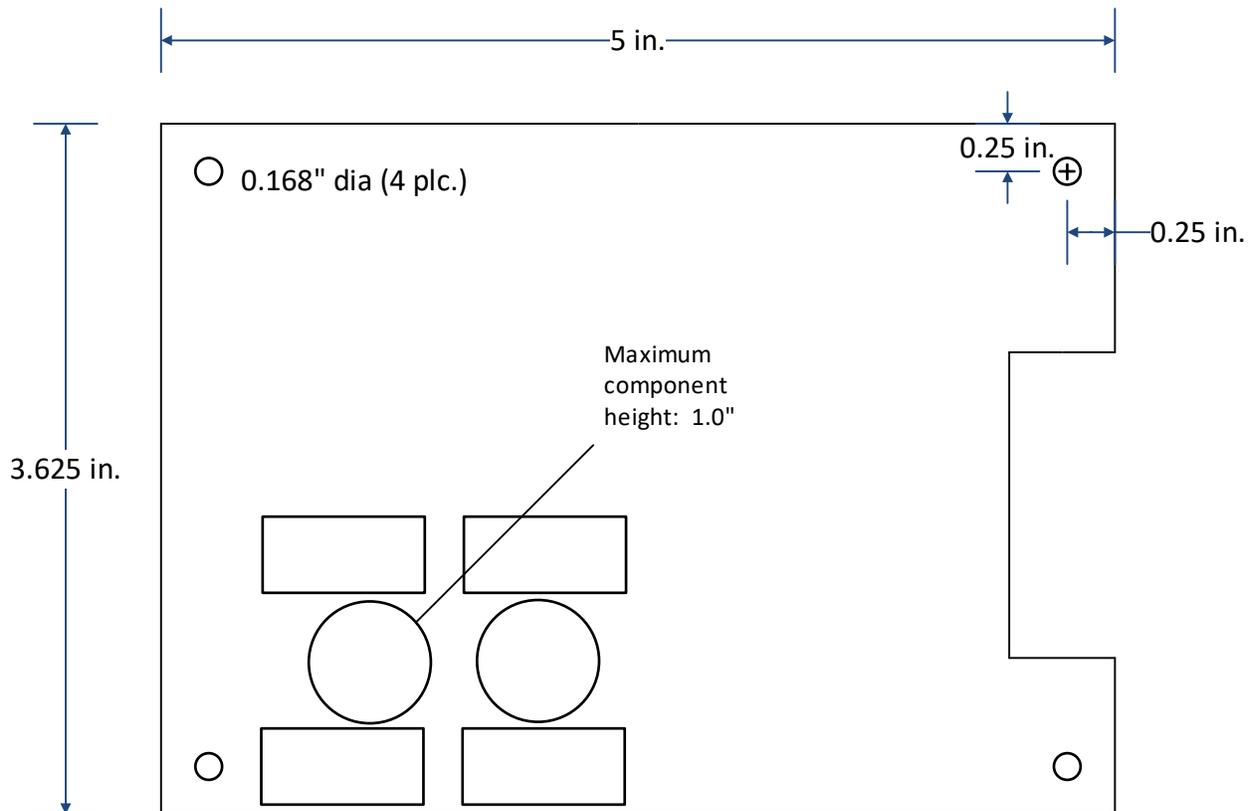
Seagull PCB Dimensions and Mounting Hole Locations.
